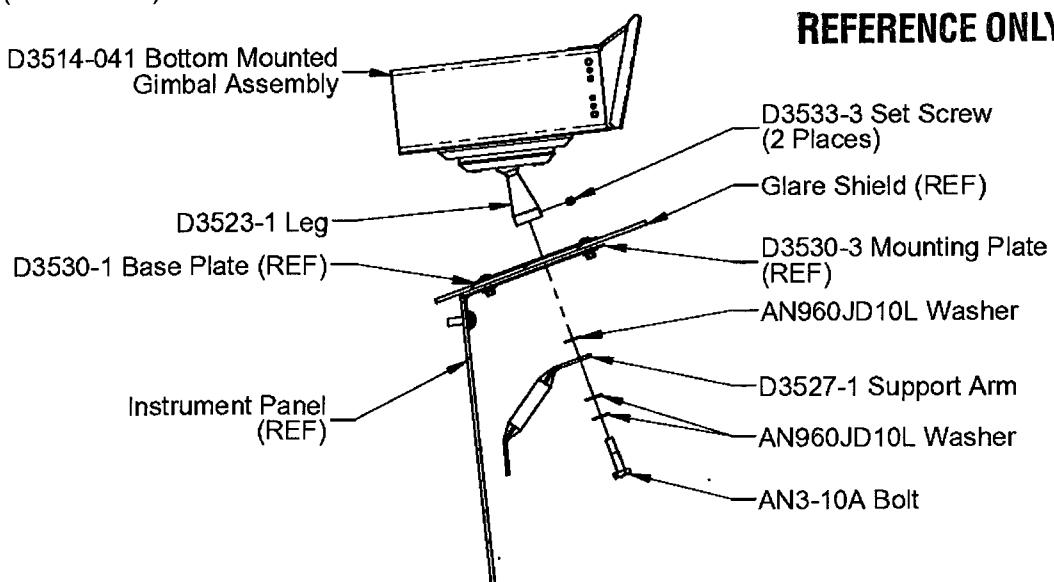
Installation of the D3514-041 Bottom Mounted Gimbal Assembly on the Glare Shield
